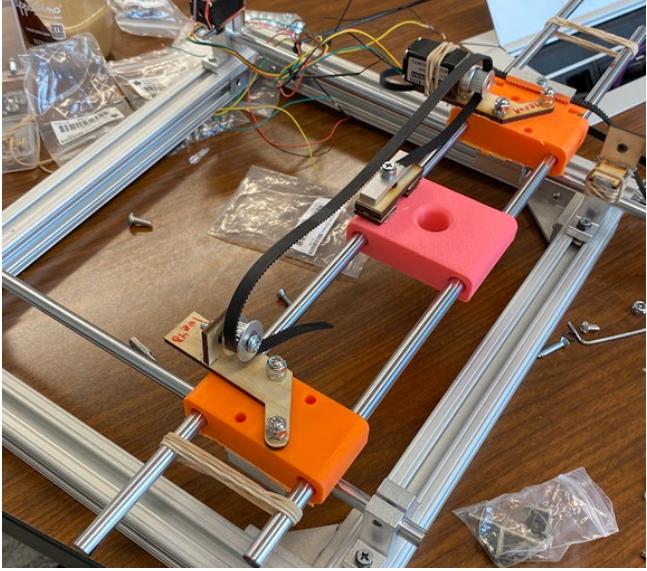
The initial prototype's movement system is affixed to the top of the frame. Showcases the smaller Nema 8 motors, and unstable mounts that would be revised before the final prototype.
